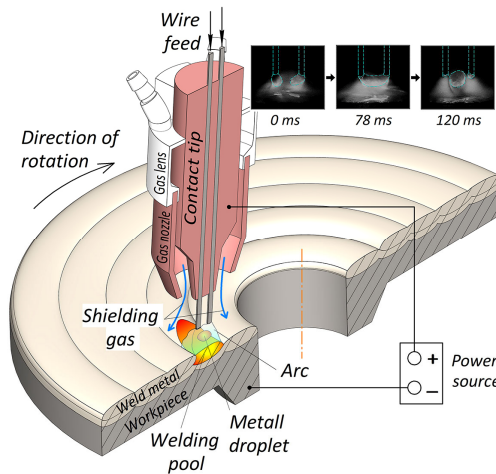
Schematic diagram illustrating the formation of a cladding layer on the flange surface through arc welding with double electrodes.
